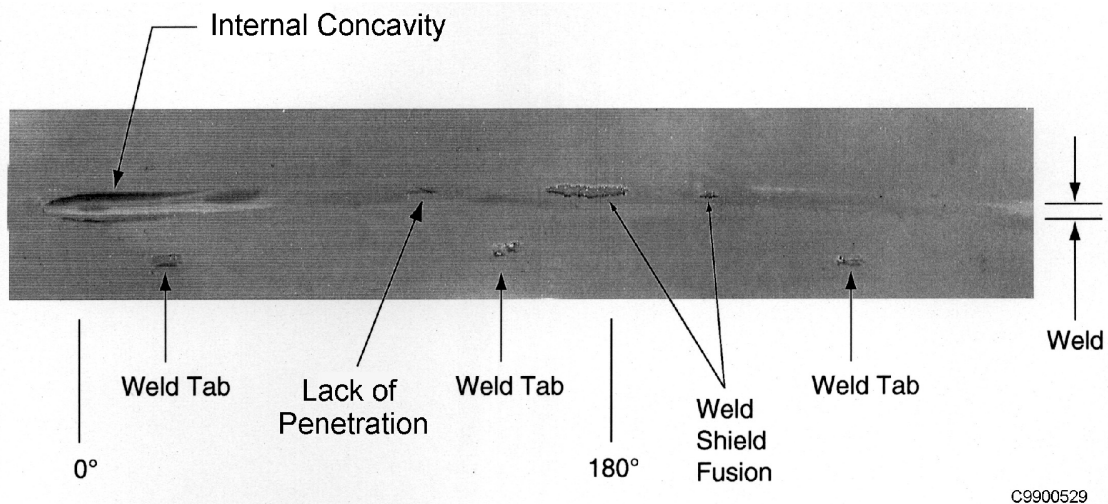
Replica of the inside surface of the girth weld in capsule WT-9.
